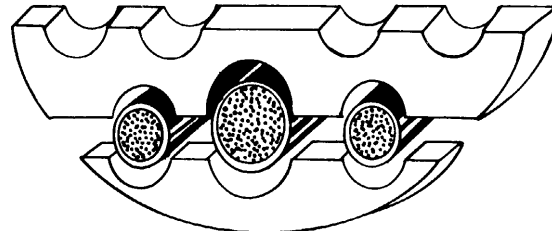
CORRECT SHAPE OF TIP CABLES
